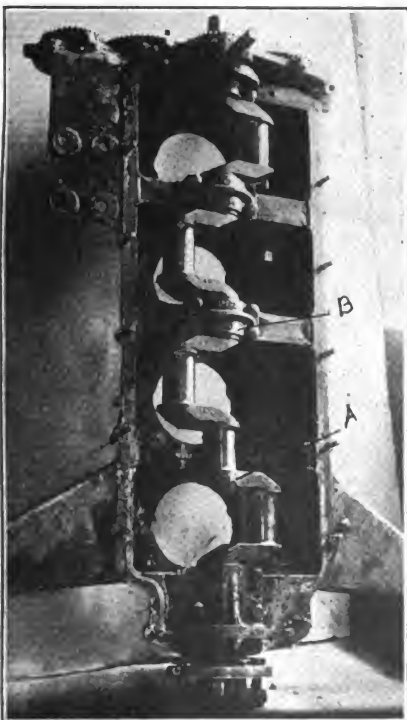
THE CRANK IN THE CASE READY FOR WELDING
